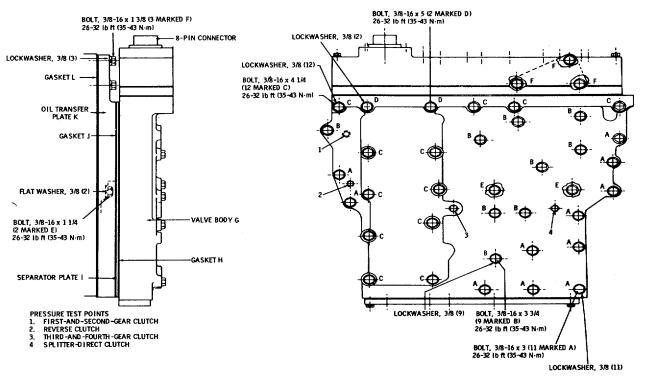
Electric Valve Body Components and Mounting Bolts
